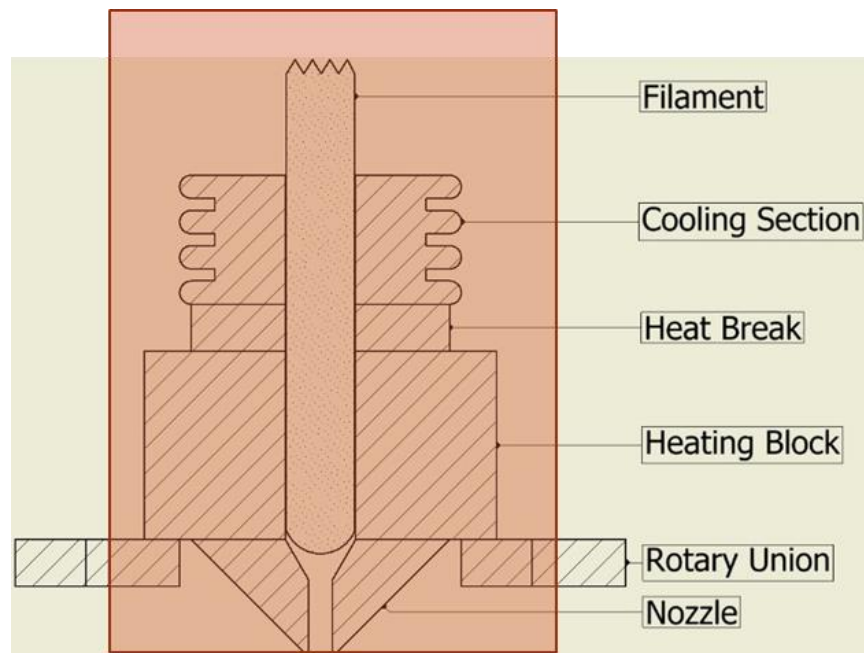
Assembly rotation. A rotary union is incorporated outside the hotend assembly of an FFF extruder. The orange box highlights the components that will be rotating.
